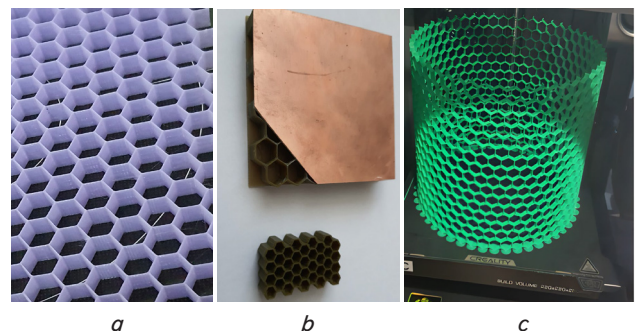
Examples of cellular fillers: *a* – flat; *b* – as part of a sandwich panel; *c* – cylindrical
